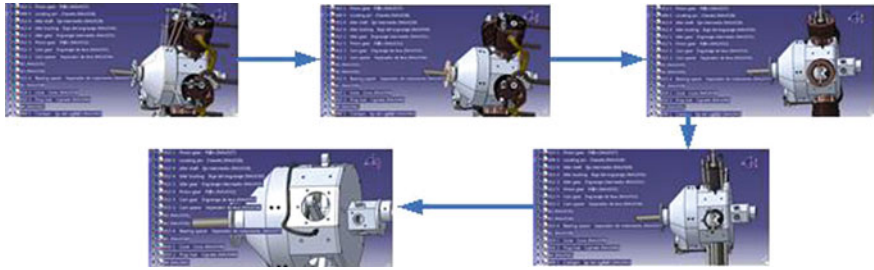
Second-level component disassembly, disassembled parts are axis of crap, cylinder, blade fixed disk and rotor center. Detailed disassembly order is: initial state—disconnect connecting strip—disassembly front cylinder—disconnect back cylinder—disconnect fill tube and fixed leg
